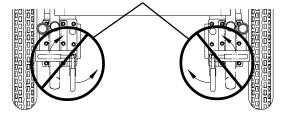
DISENGAGING/ENGAGING MOTORS WITH CLUTCHES
